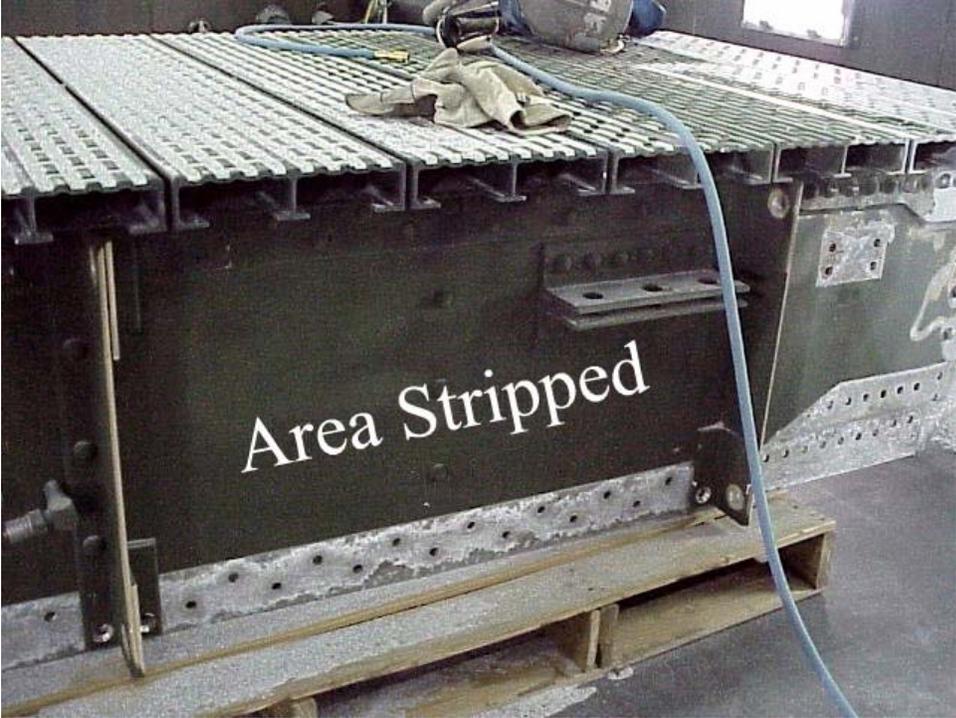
Marked Tool Boxes Stripped with Garnet DMB at Albany MCLB
